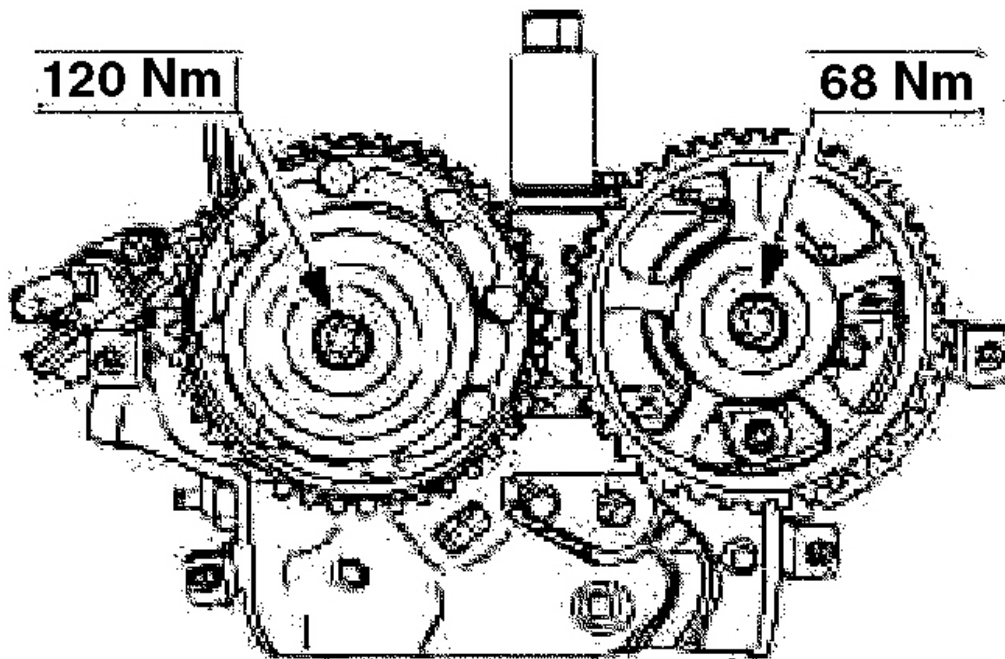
Tightening Bolt While Holding Adjusting Washer In Position
